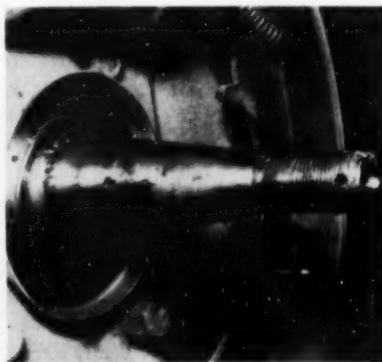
B—Spindle of Passenger Car Front Wheel After 10,000 Miles.
